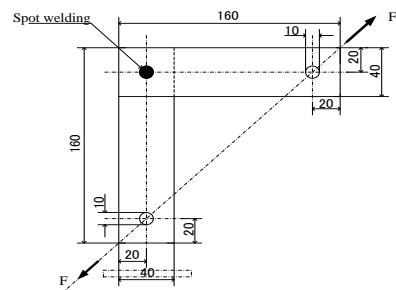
Spot-welded joints under torsional shear for fatigue testing
